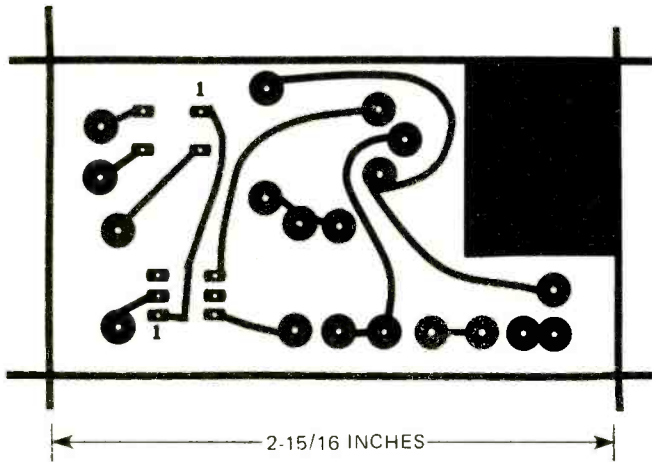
FULL SIZE FOIL PATTERN makes the printed circuit-board easy to build from this template.
